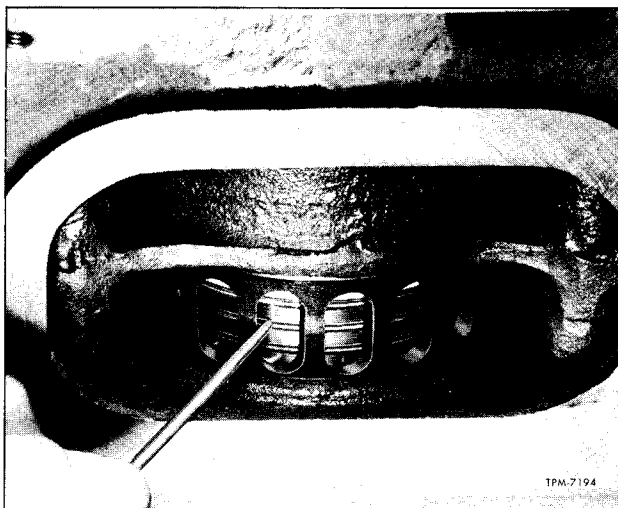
Inspection for Broken or Stuck Piston Rings (Typical)
